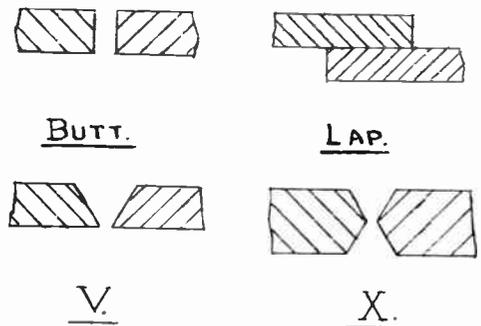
TYPES OF WELDS. Showing the correct relative positions and preparation of two parts to be welded.
